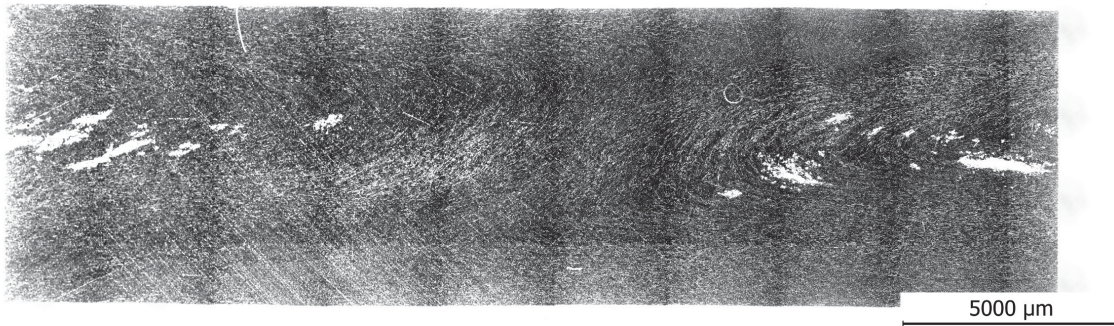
Polish number 2 of the insert type blade, position 0.65 mm from nozzle side. At this position the weld line becomes broader and it becomes hard to distinguish between bulk and the weld line area.
